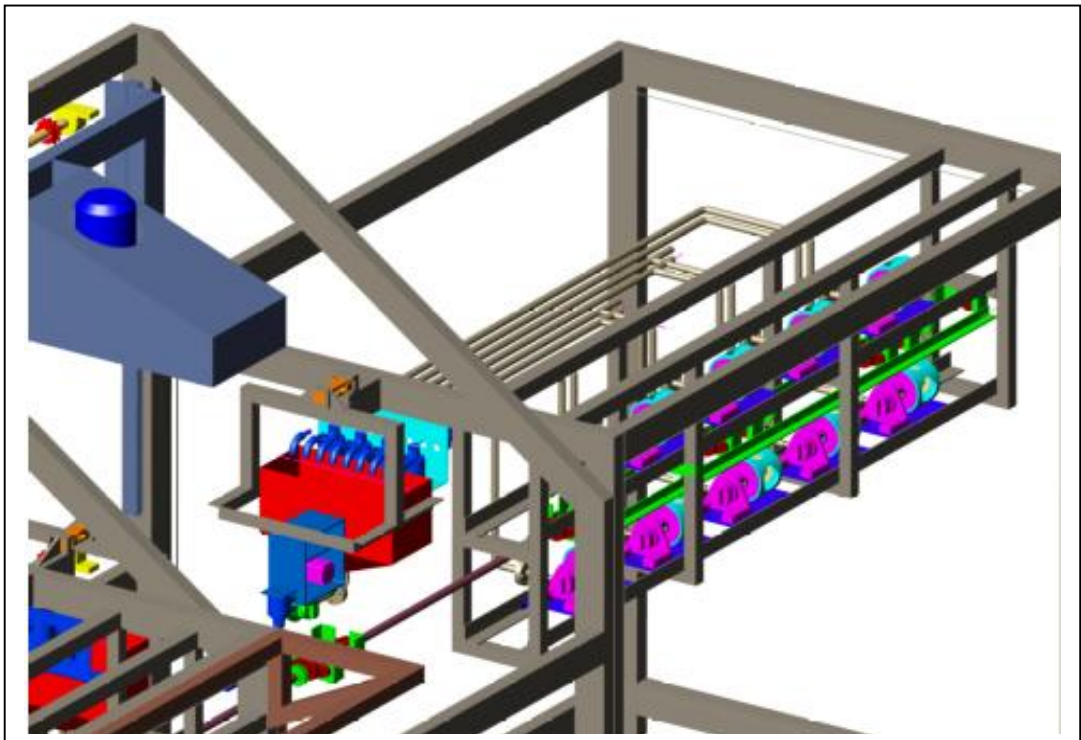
Close-up View of Mixing Head, Collecting Tank, and Pumps
